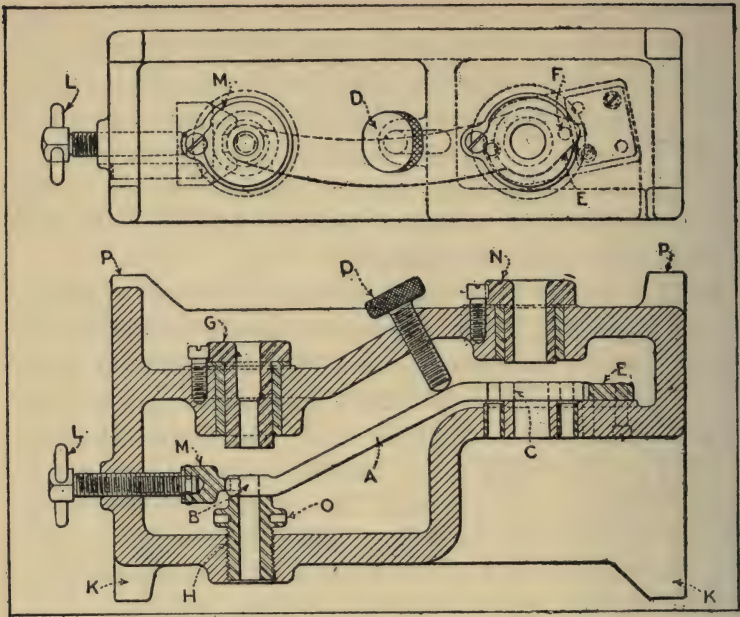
DRILL JIG FOR A CROOKED LEVER
